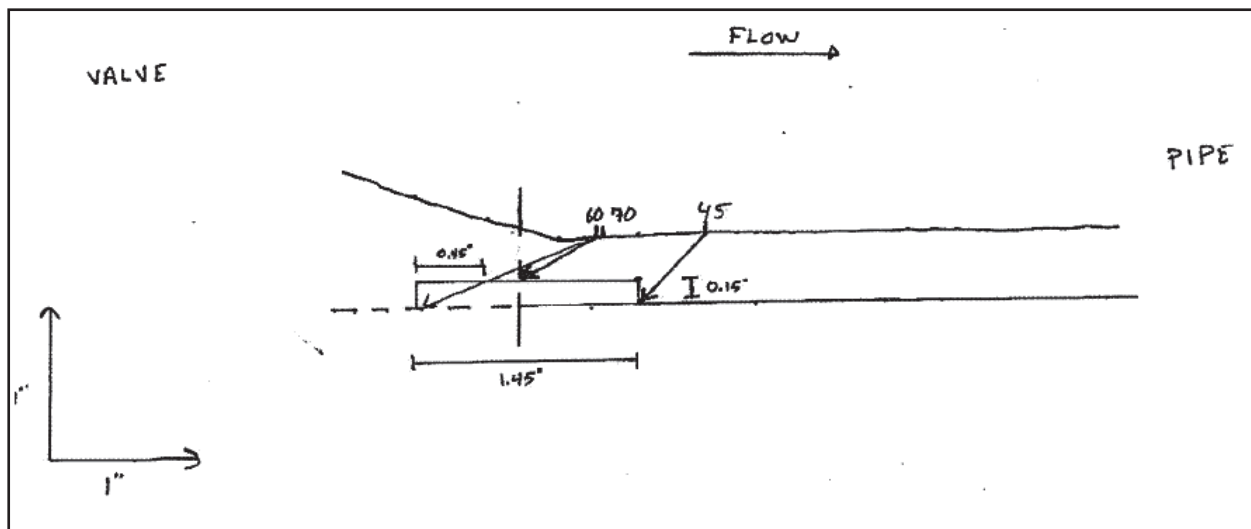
RCF-D144-03, Weld Profile Axial Scan
